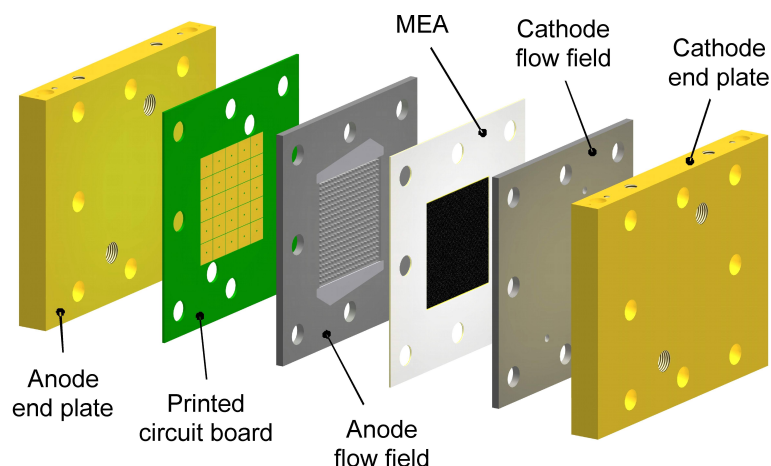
Exploded assembly drawing of the test cell including the adapter printed circuit board (PCB) used in [1, 2].
